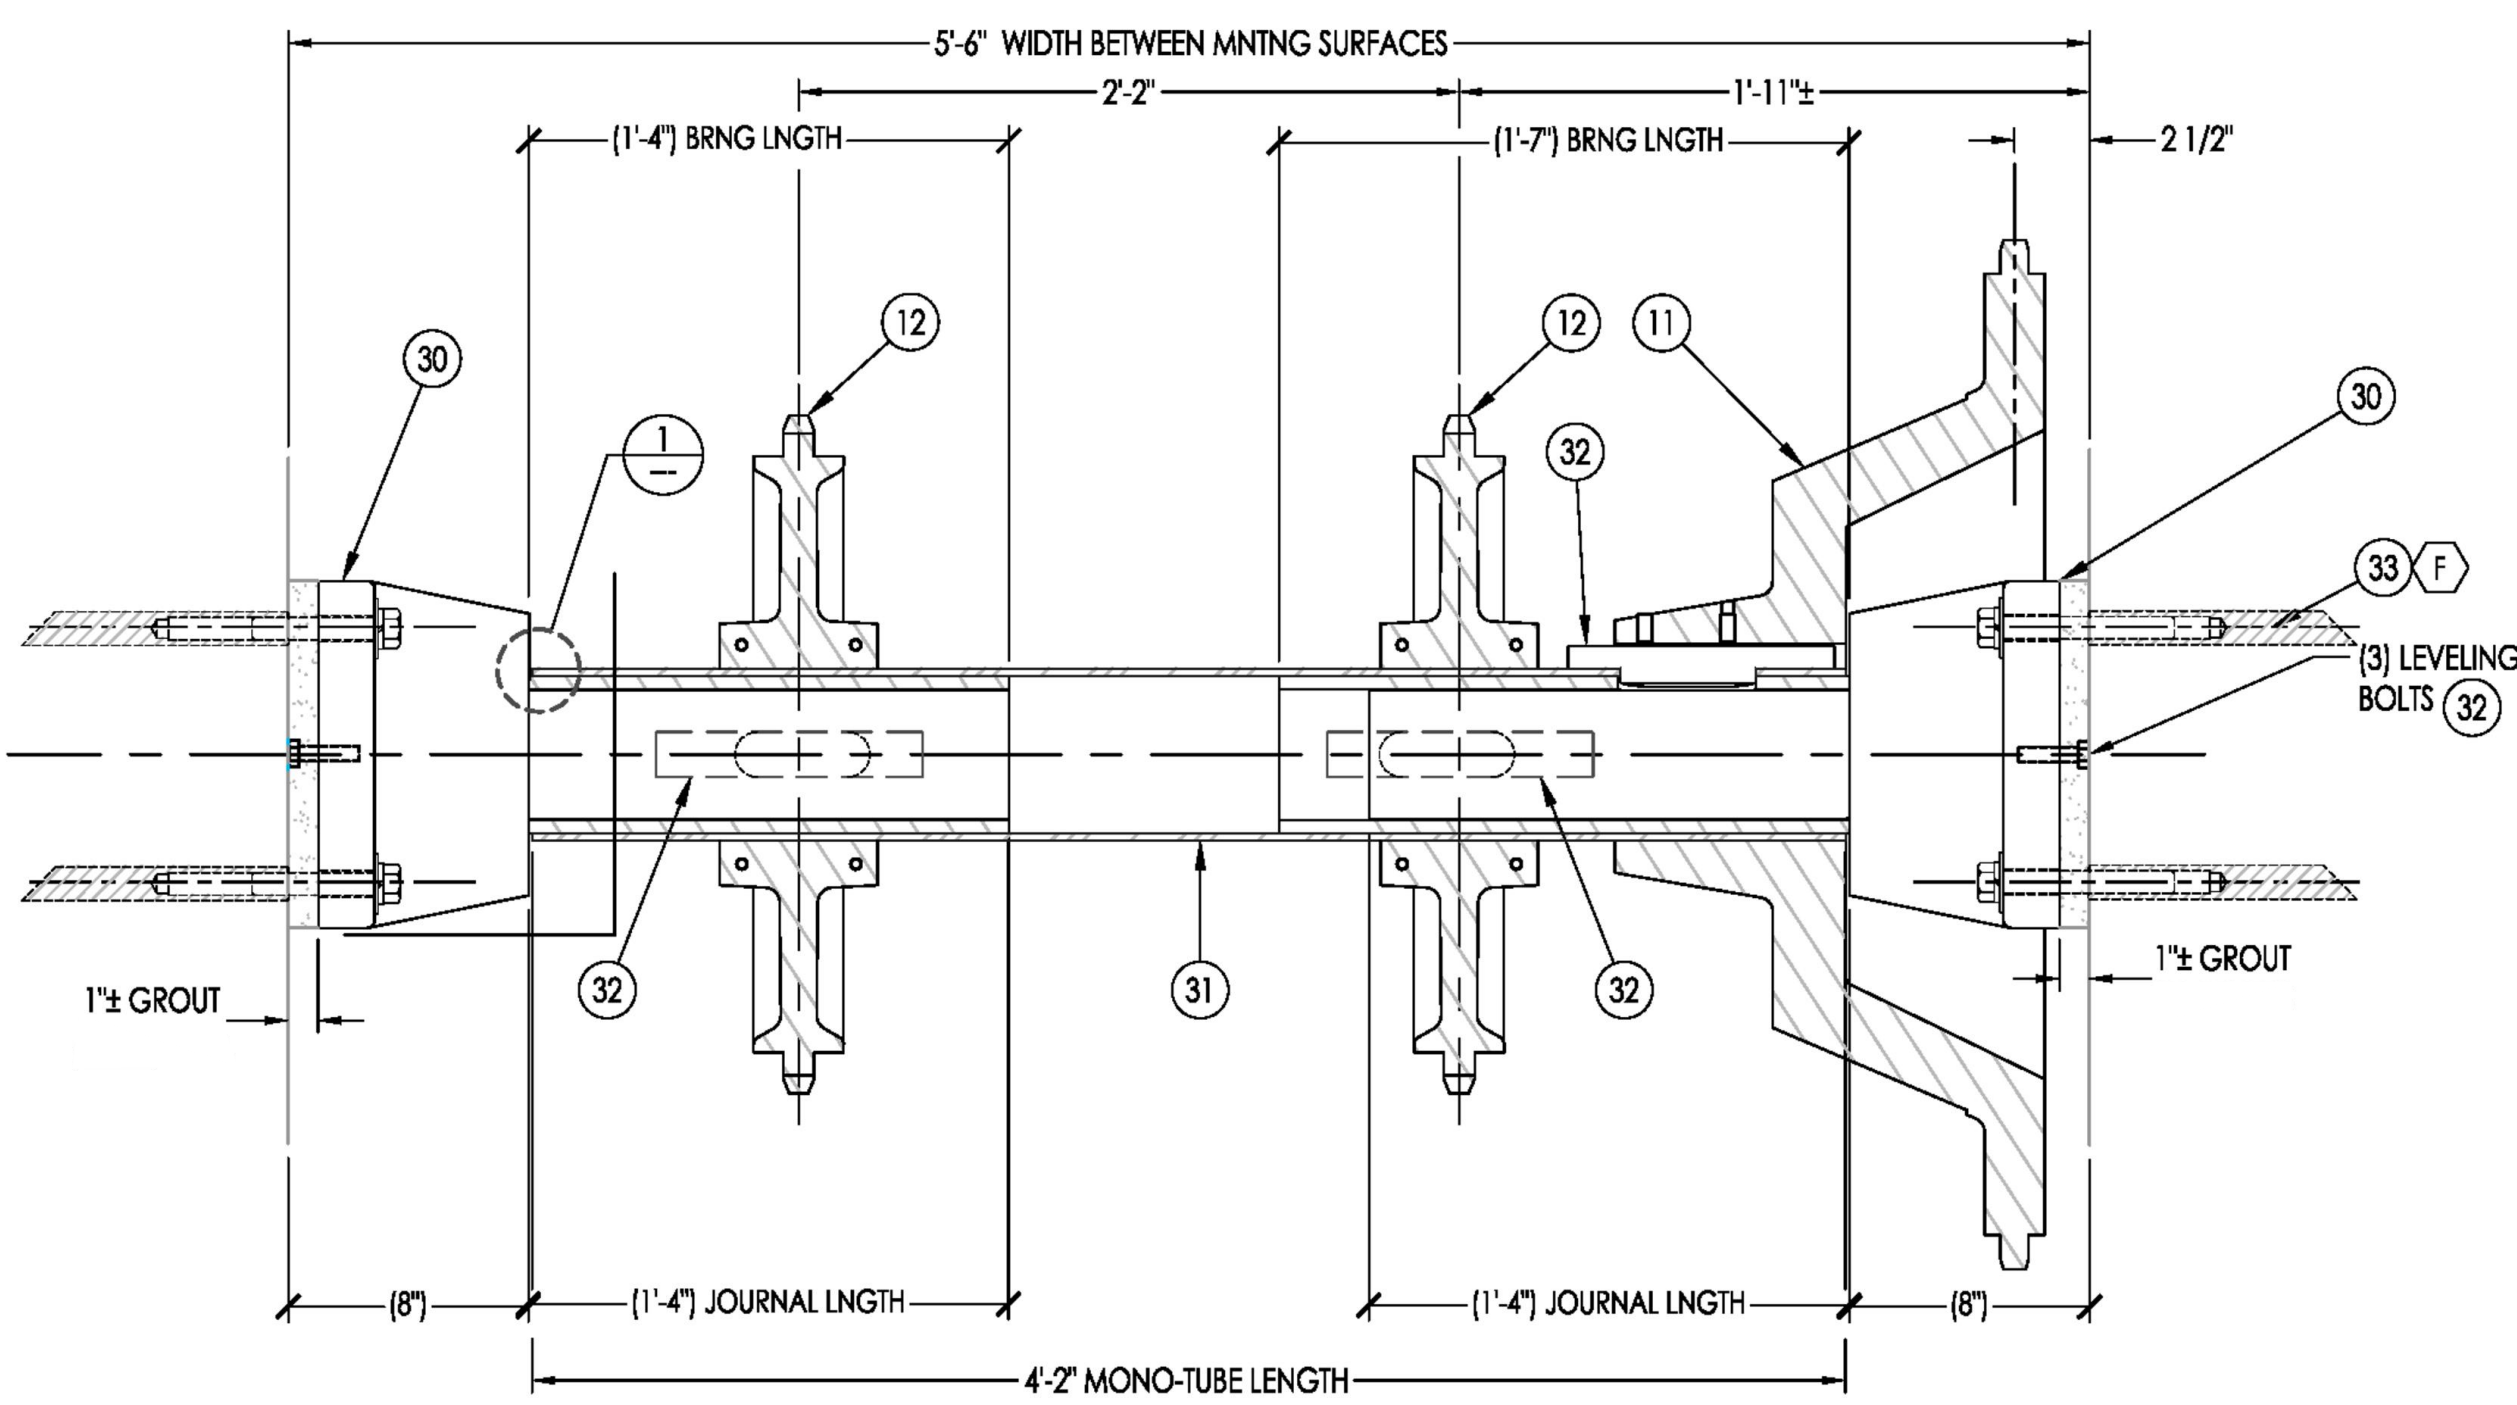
DETAIL SHEET: LONGITUDINAL HEAD SHAFT
